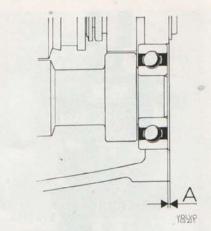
Clearance for intermediate shaft A=0.00-0.05 mm (0-0.002")
